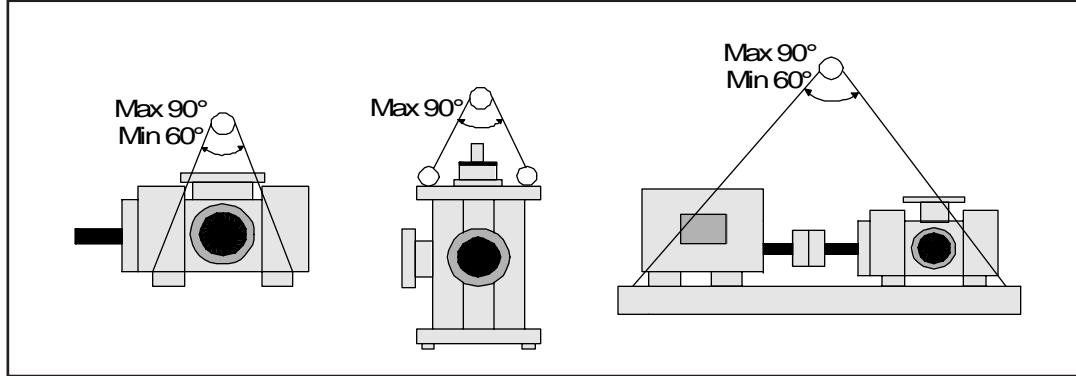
Lifting Pumps and Pump/Driver Assemblies.
